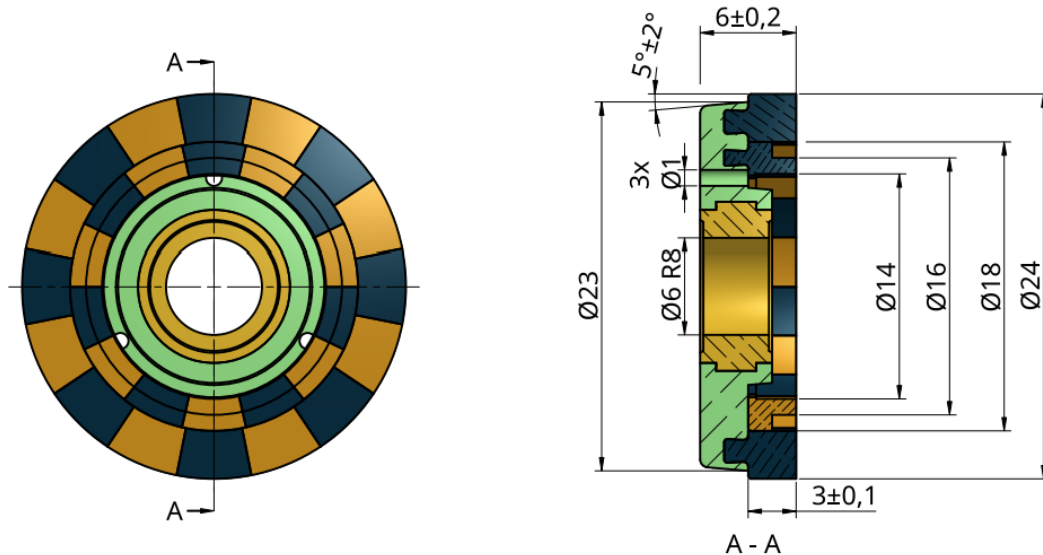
Dimensions of MLXMAGNT-VER-002. Unless specified otherwise, dimensions are millimetres.
